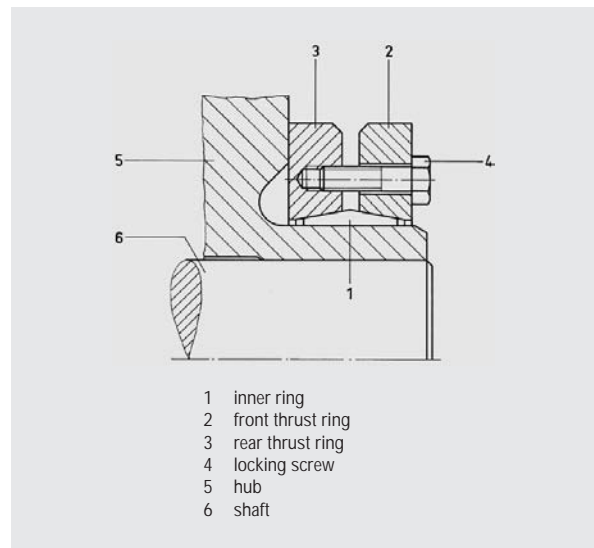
· RINGFEDER® Shrink Disc RfN 4071 /4091/4051/4073 designation of the parts
